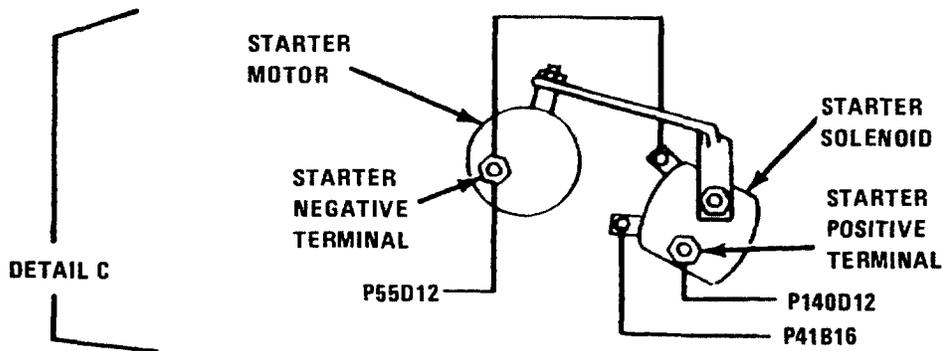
Wiring Harnesses, Removal and Installation (Sheet 5 of 5)
